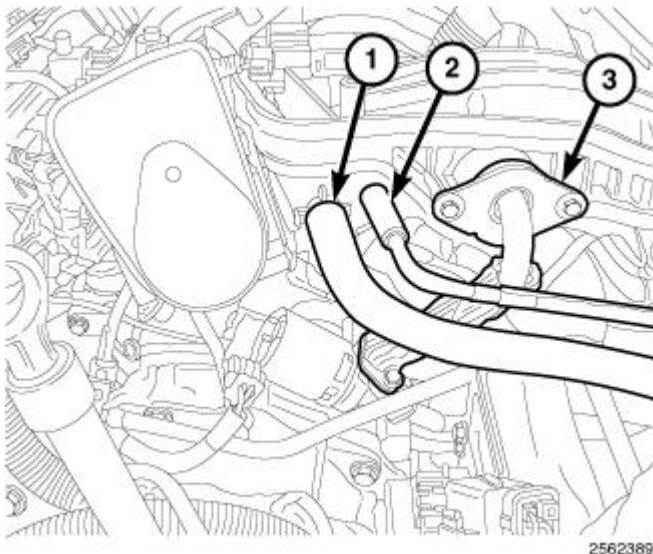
Locating Upper EGR Tube, Brake Booster Hose & Vapor Purge Hose
